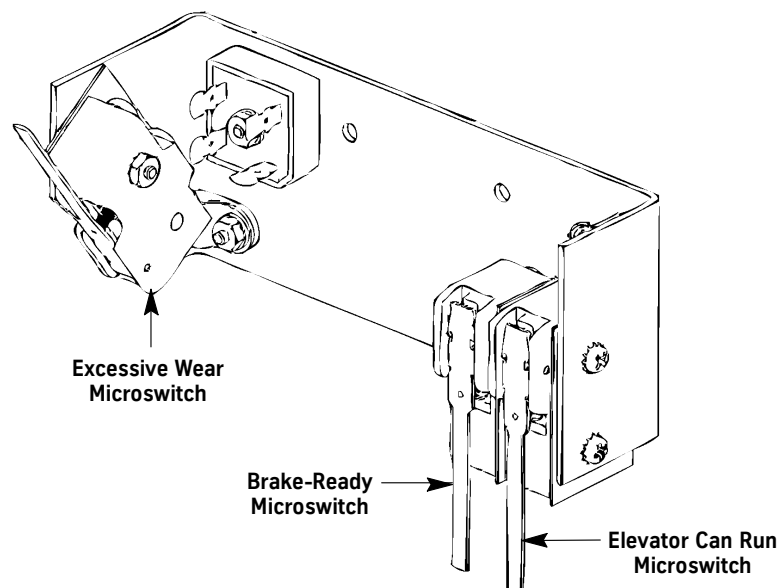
Brake-ready Microswitch and Trigger Mechanism
